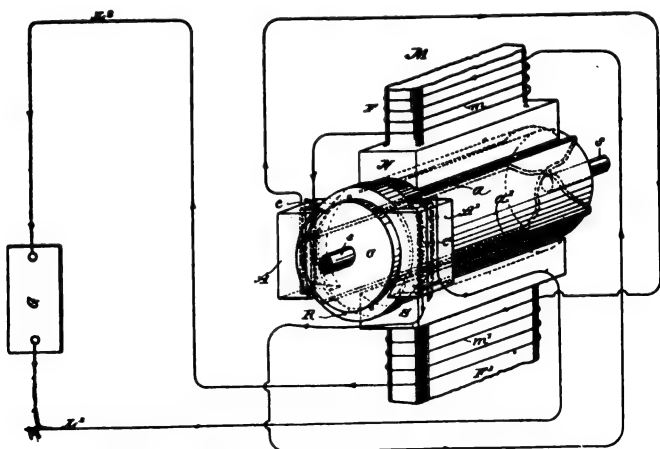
STANLEY'S ALTERNATING MOTOR.
